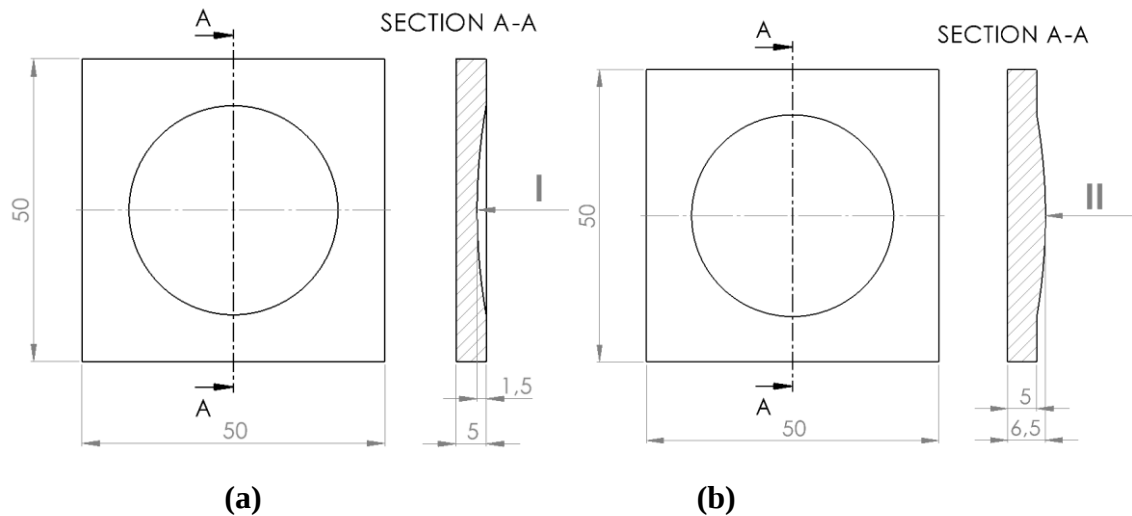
Shape of specimens with dimensions: (a) concave 1-3; (b) convex 4-6.
